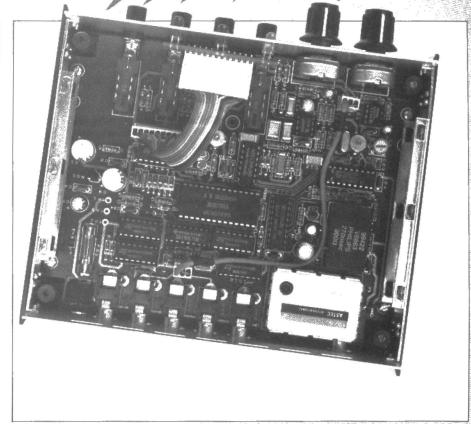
Plain view of the assembled PCB fitted into the suggested case.
